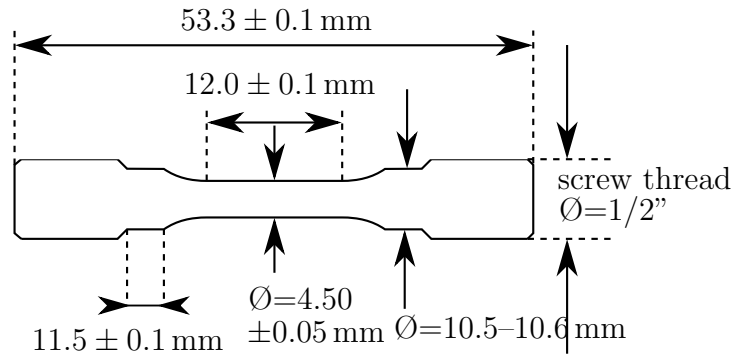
Schematic drawing of a fatigue specimen used in the current study. The screw threads of each sample were shot peened to prevent failure outside the gauge length.
